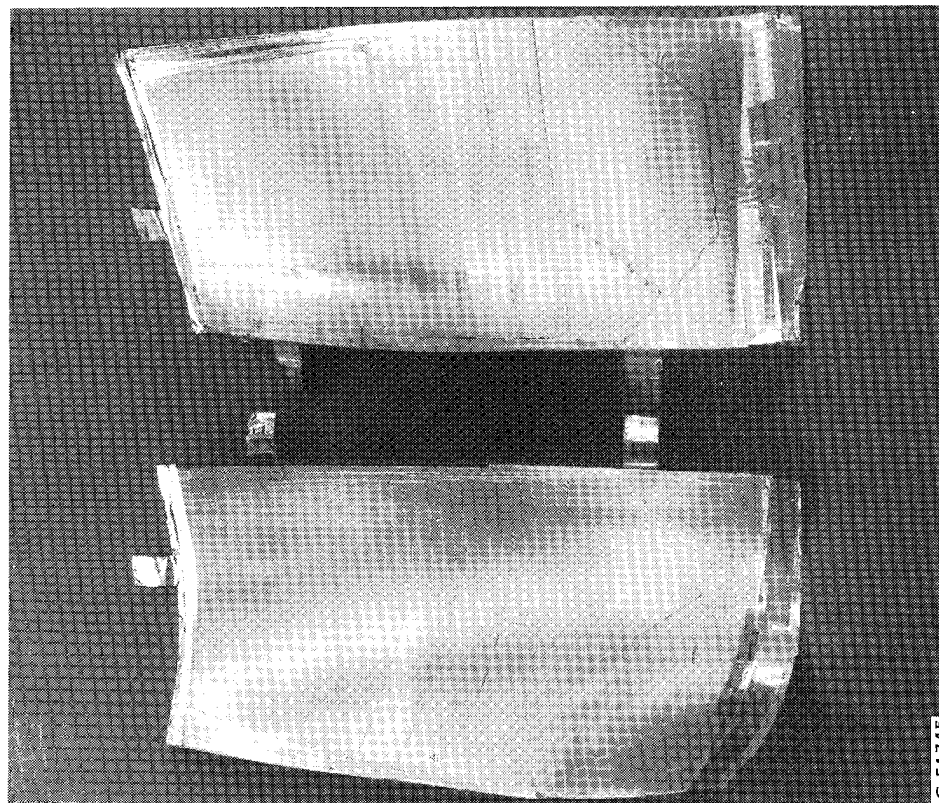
CONSOLIDATED SHELL PRESSINGS EXTERNAL & INTERNAL SURFACES AFTER BONDING
